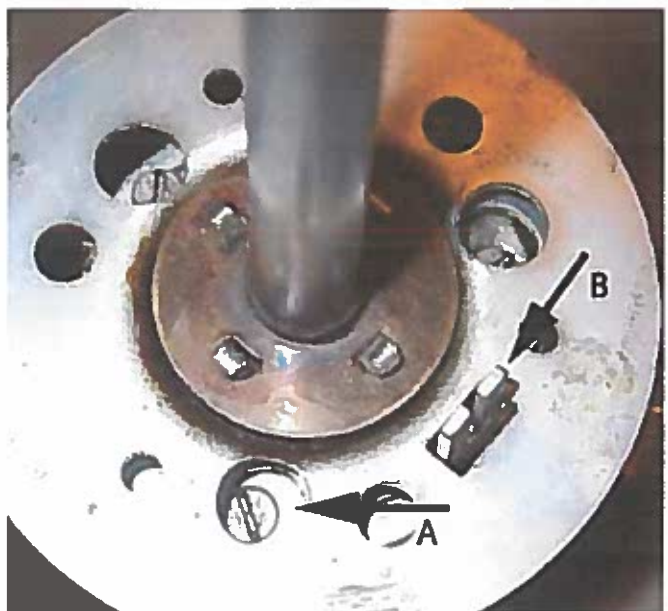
With the cover plate rotated, three holes in it allow access for installing the mounting screws. Tab (B) is part of the wavy steel cancelling piece.
